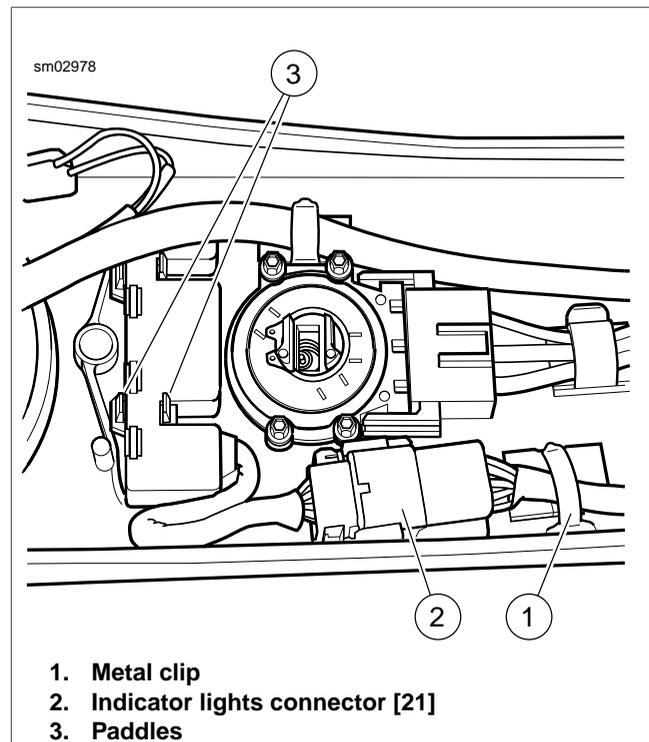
Release Paddles to Free Indicator Lights Assembly (FLHR/C)
